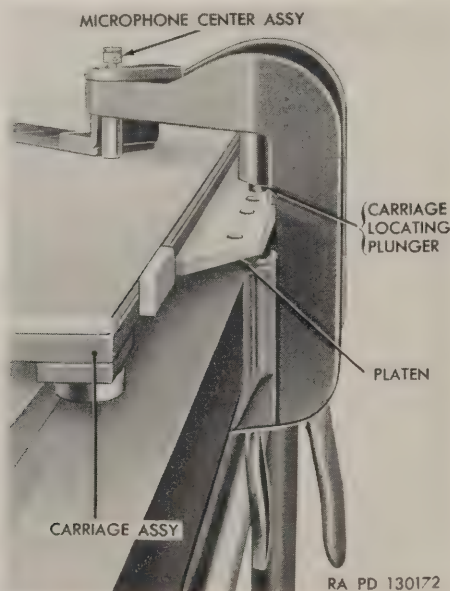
Carriage locating plunger seated firmly in the tapered hole of platen—sound-ranging plotting board M1 or M1A1.
